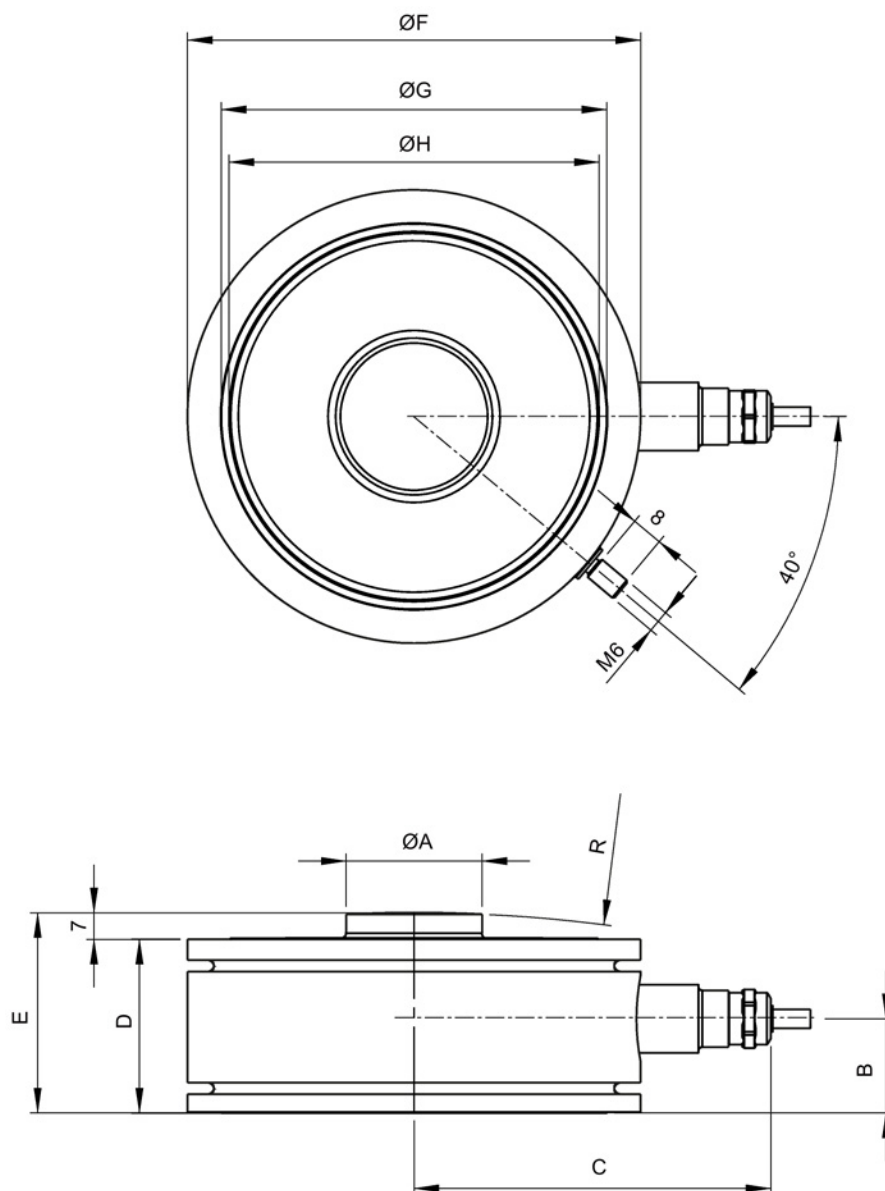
Dimension drawing for SIWAREX WL280 RN-S SA, rated load 28 t and 60 t
